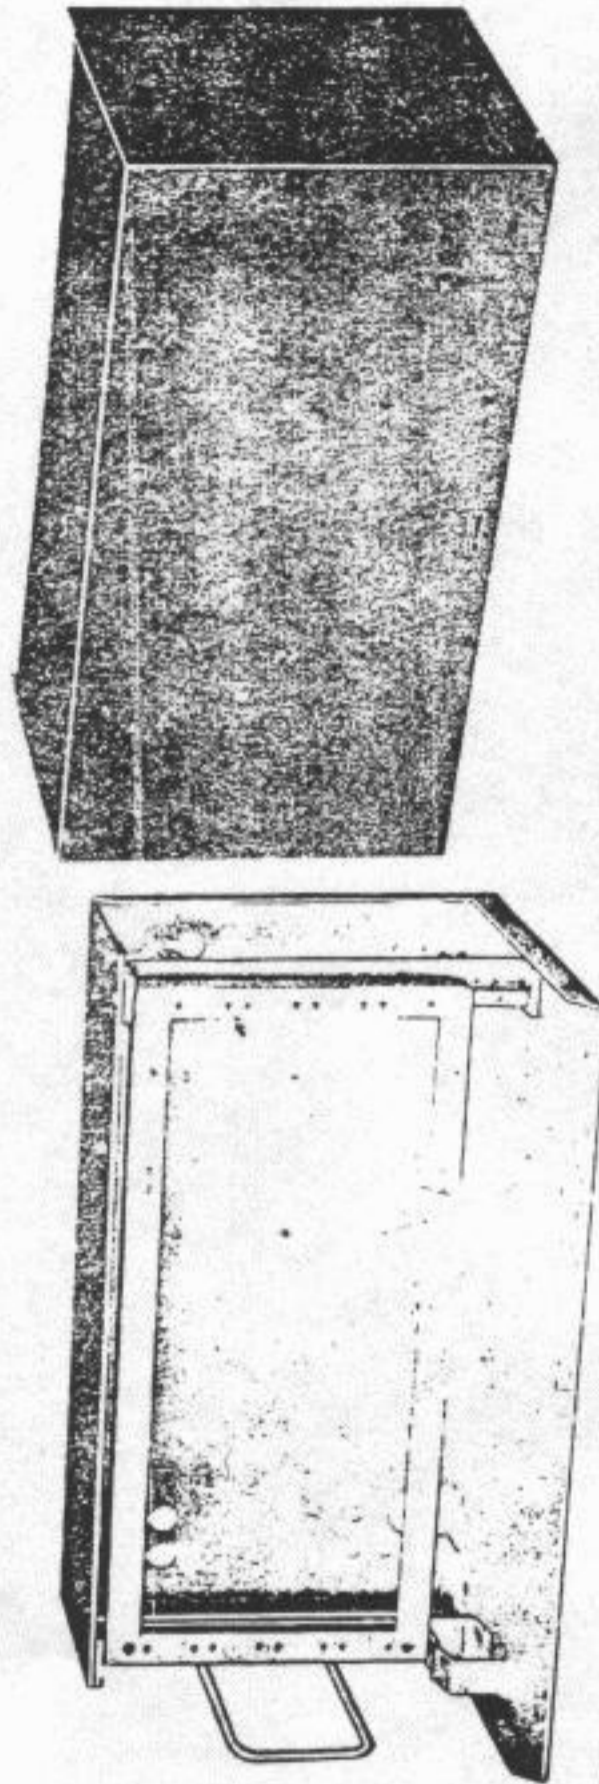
Plate Cabinet Type A-Cover Removed
